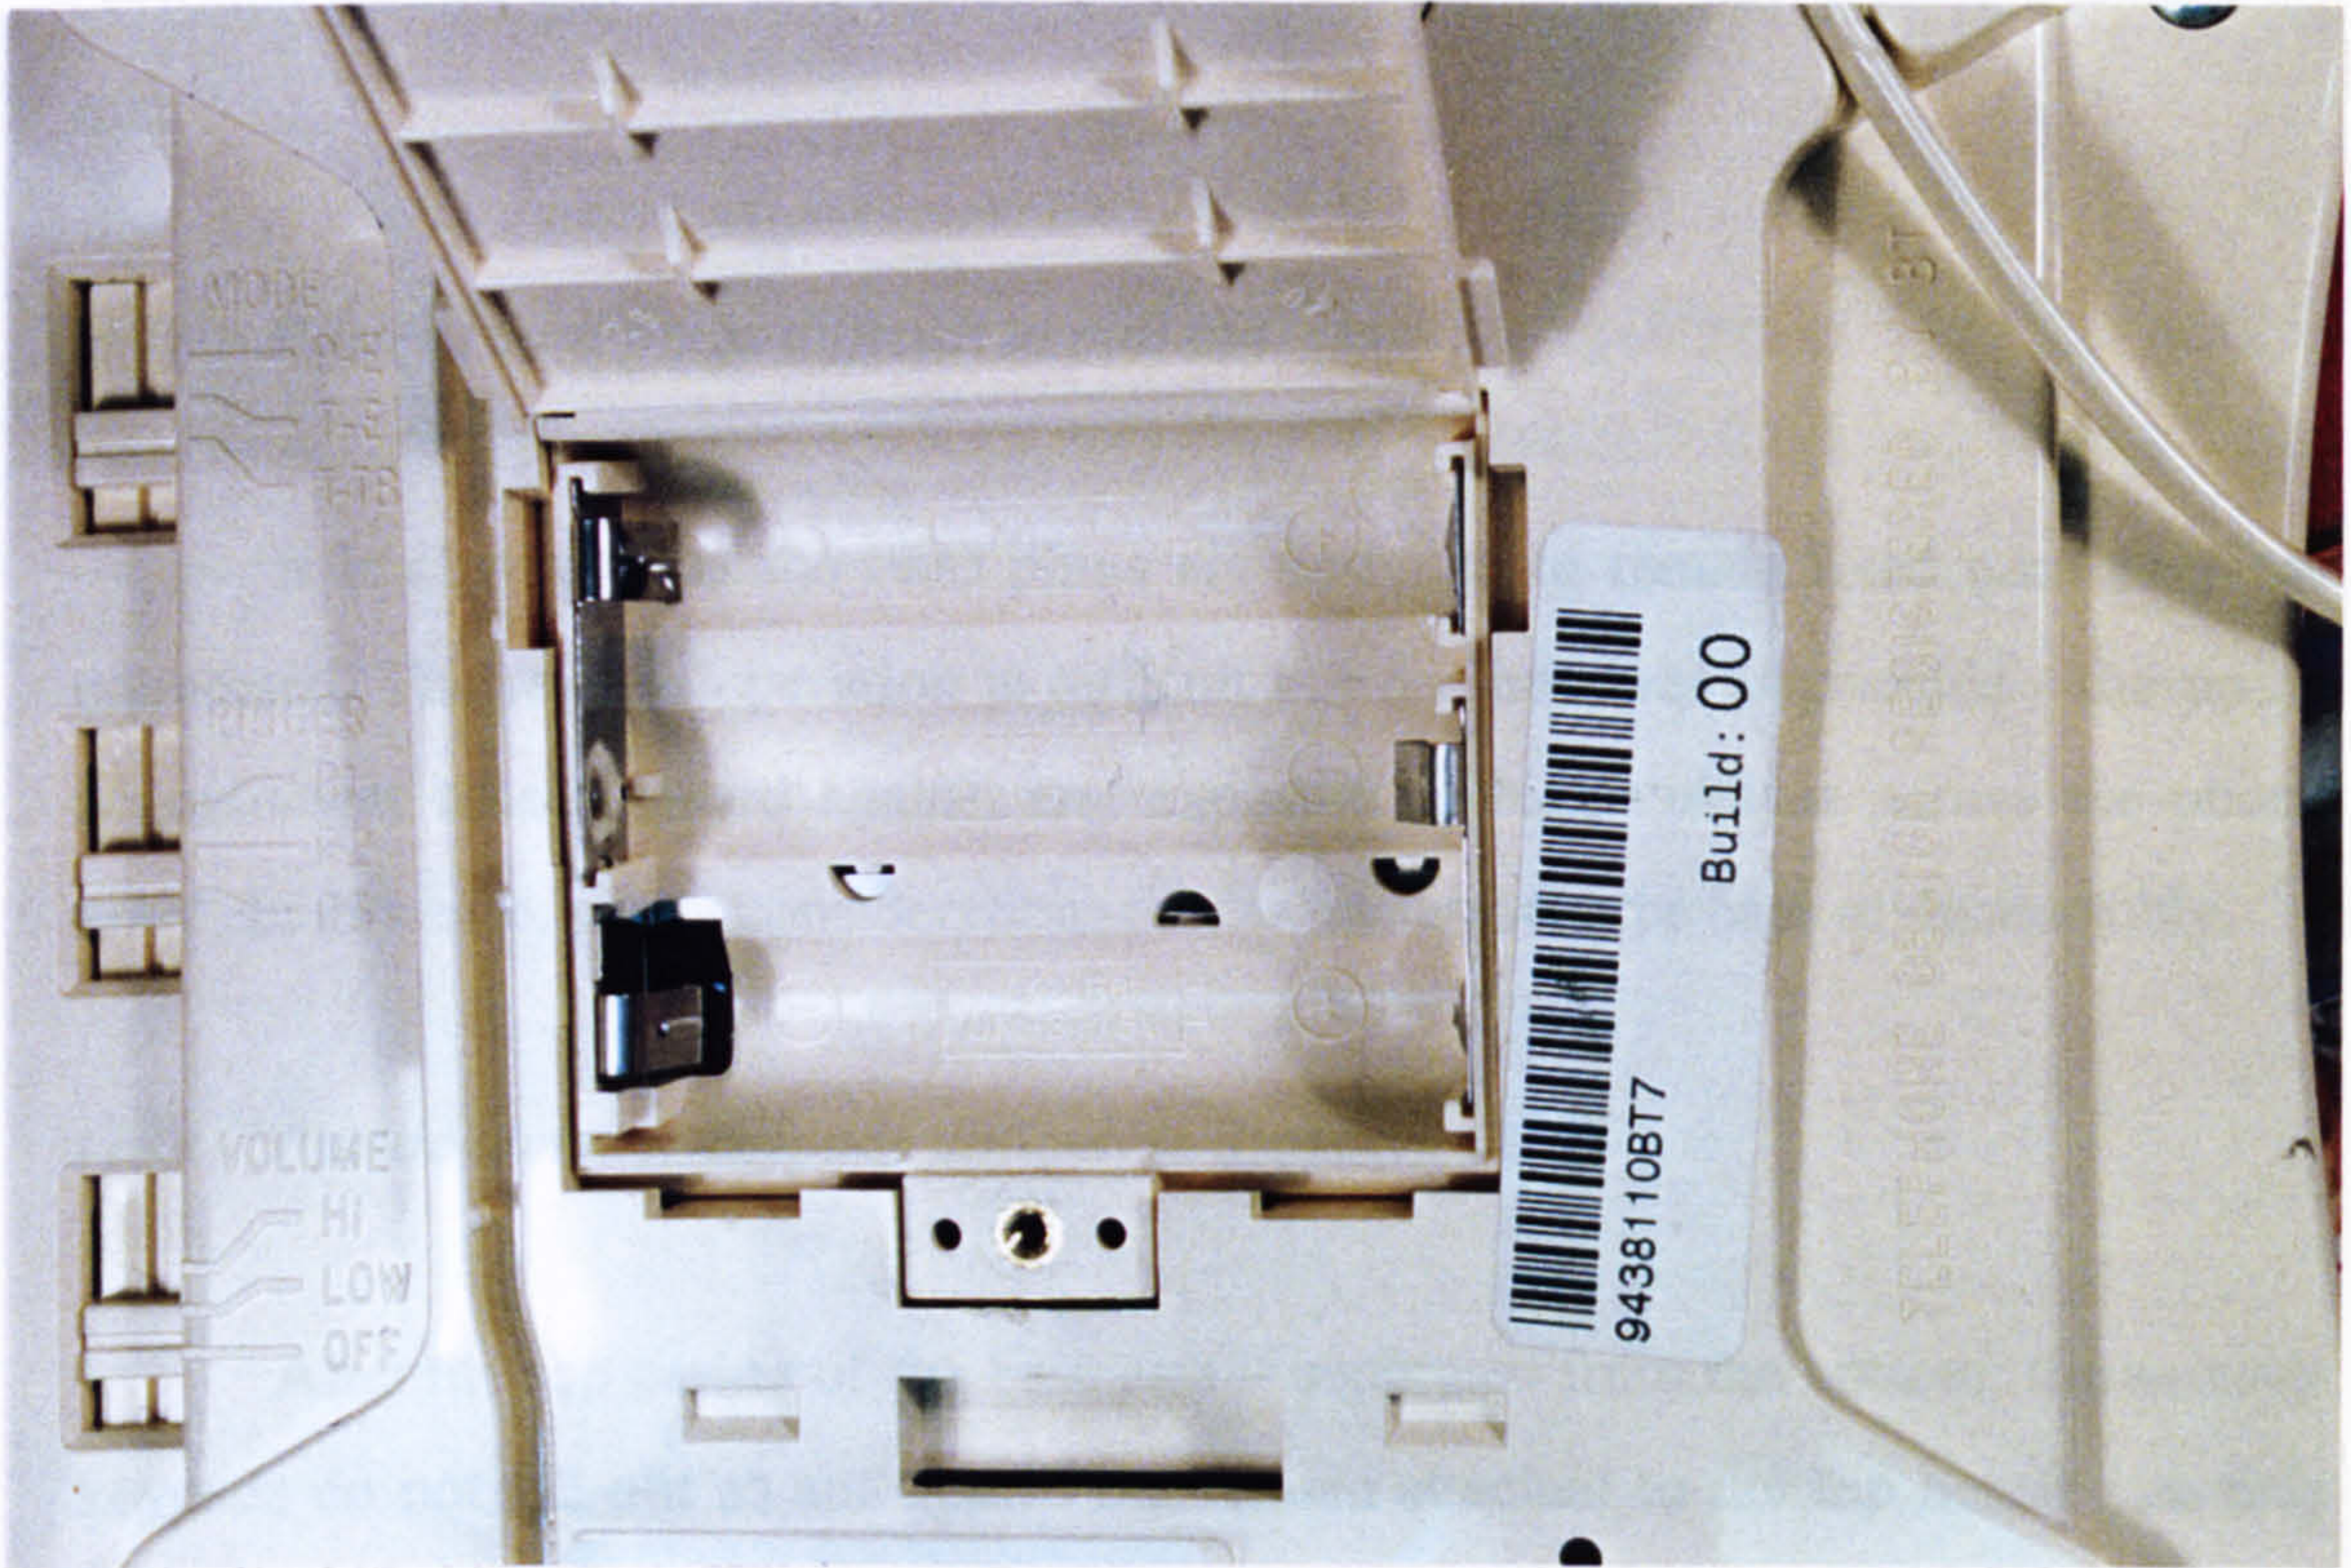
Design of the battery compartment consisting of metal inserts and threads which have to be removed prior recycling
